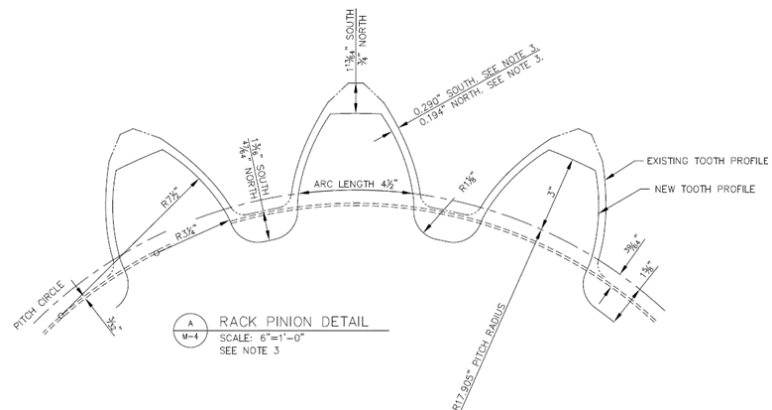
Design drawing excerpt showing new pinion tooth profile inside extents of existing pinion forgings.
